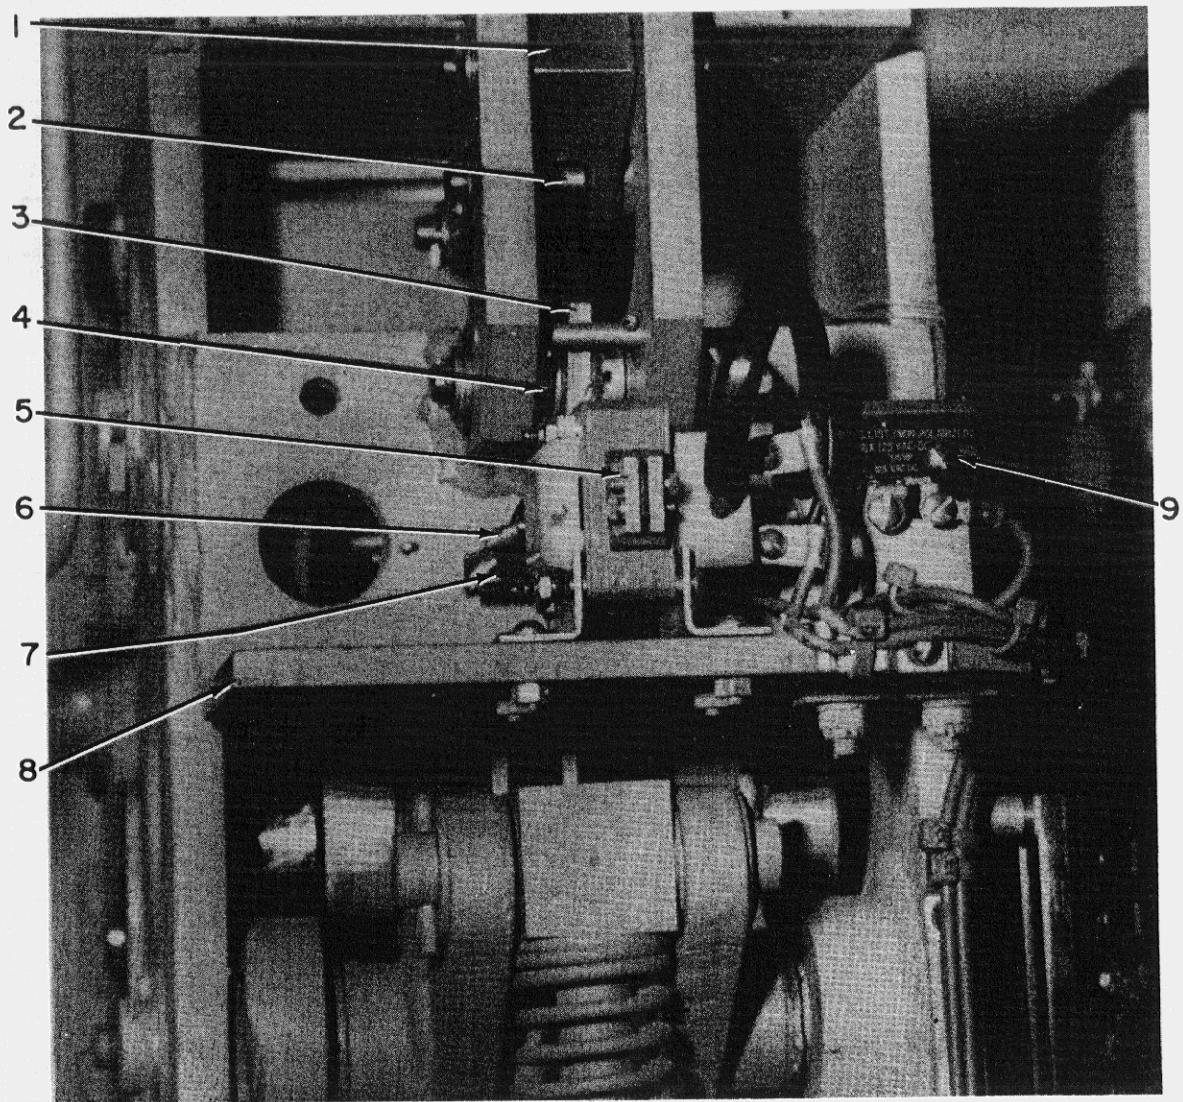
Single trip latch assembly, left front view (for MA-13-8 and MA-13-8A)
